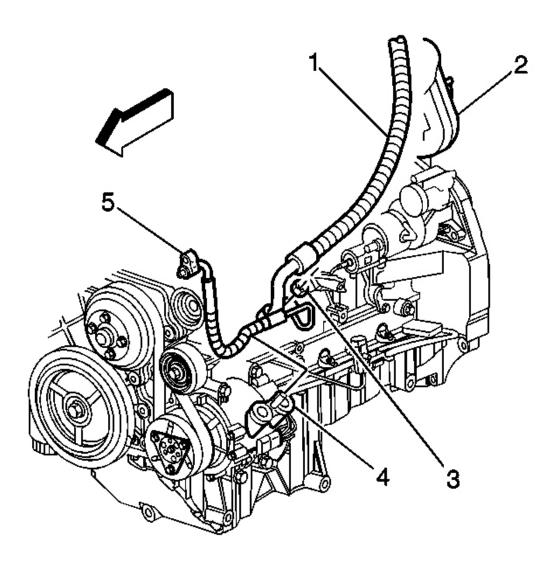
View Of Compressor Hose Assembly Courtesy of GENERAL MOTORS CORP.
